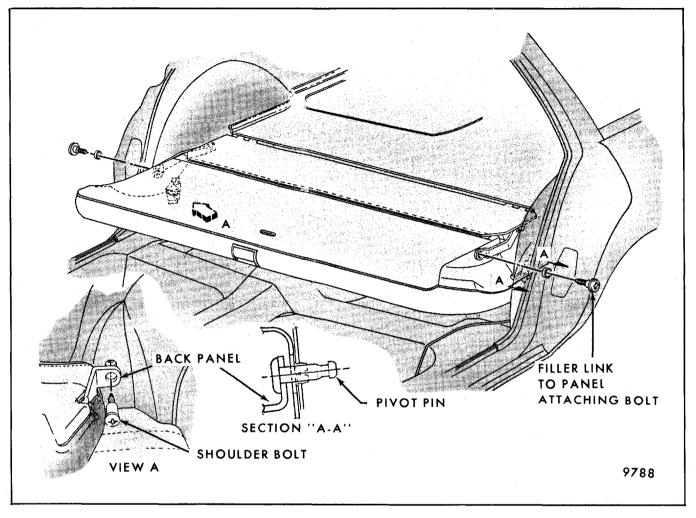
Folding Second Seat Back and Filler Panel - A Styles
